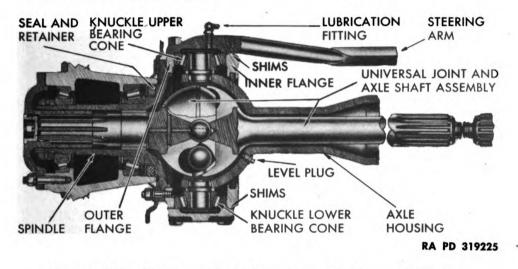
Cross-section of Universal Joint and Steering Knuckle—Left Side (6 x 6)
